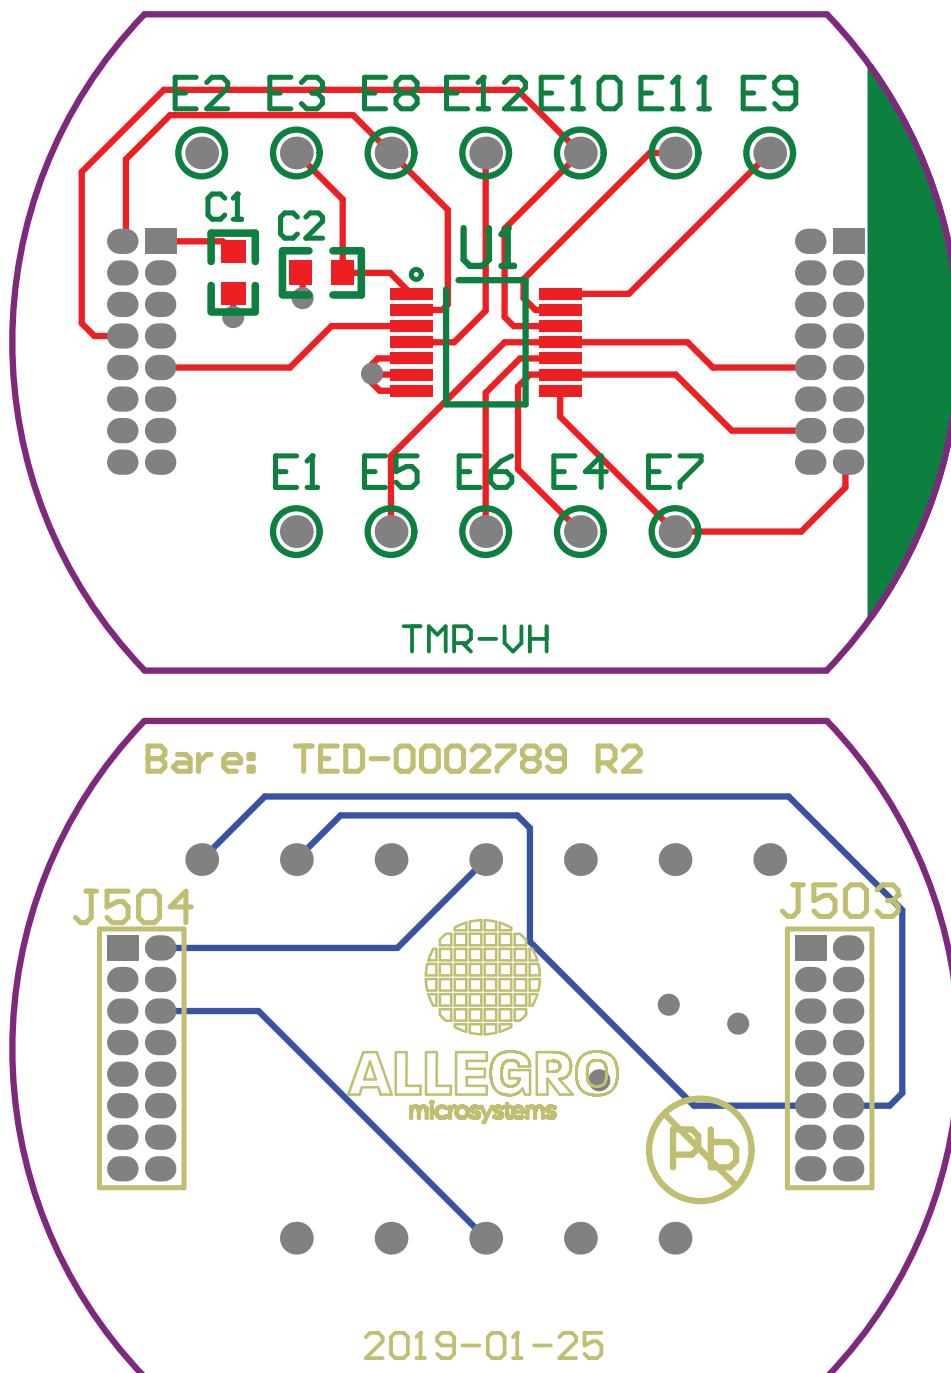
A33110 (A33115) Surface-Mount Granddaughter Board, Single Die
